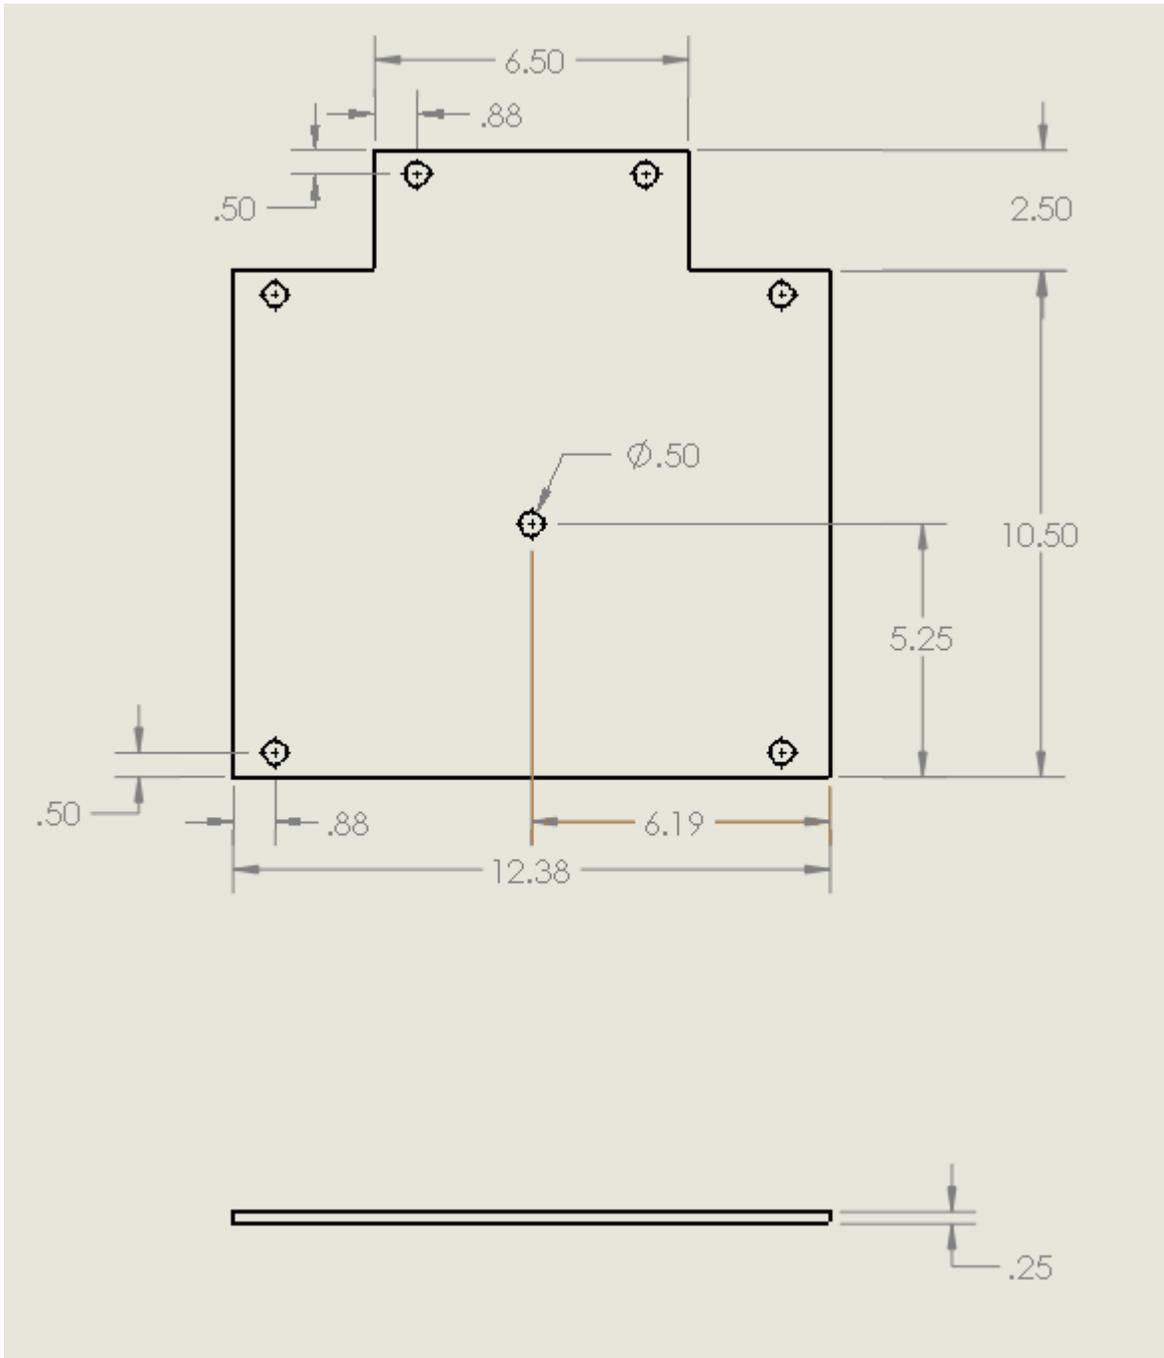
Mounting Plate detail with dimensions in inches. The mounting plate is composed of PVC.
